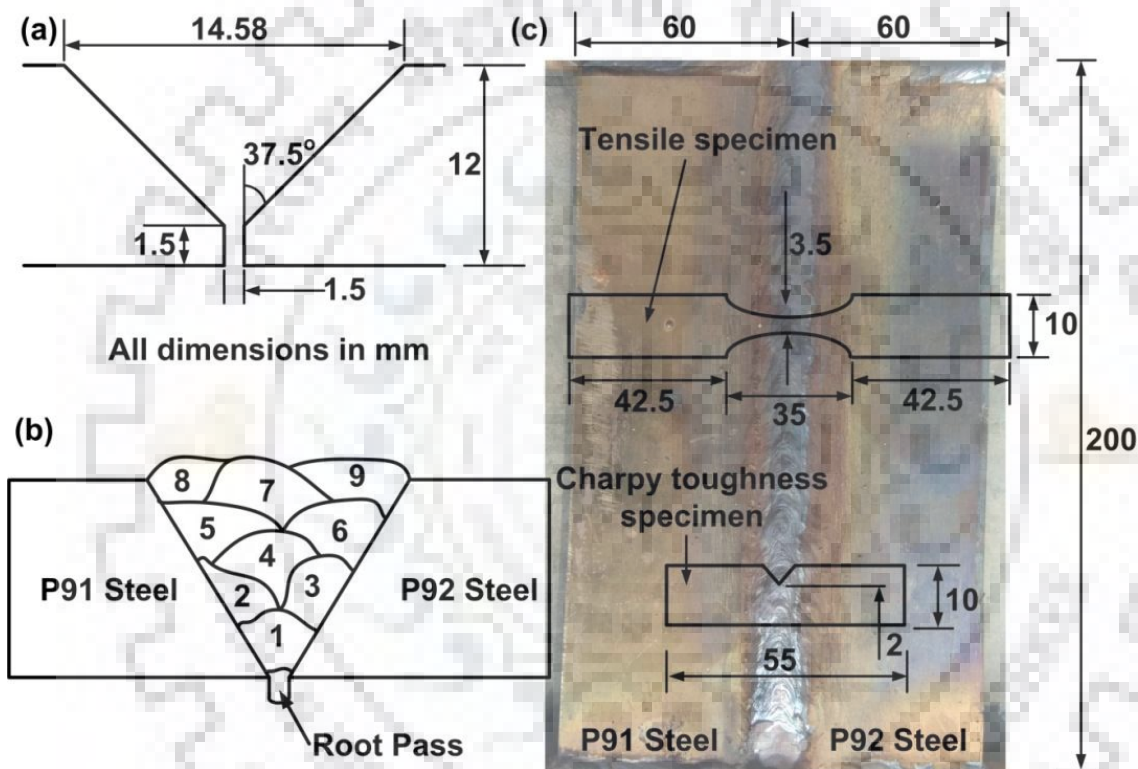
(a) Groove design, (b) sequence of welding passes and (c) complete welded joint with tensile and Charpy toughness sample locations.
